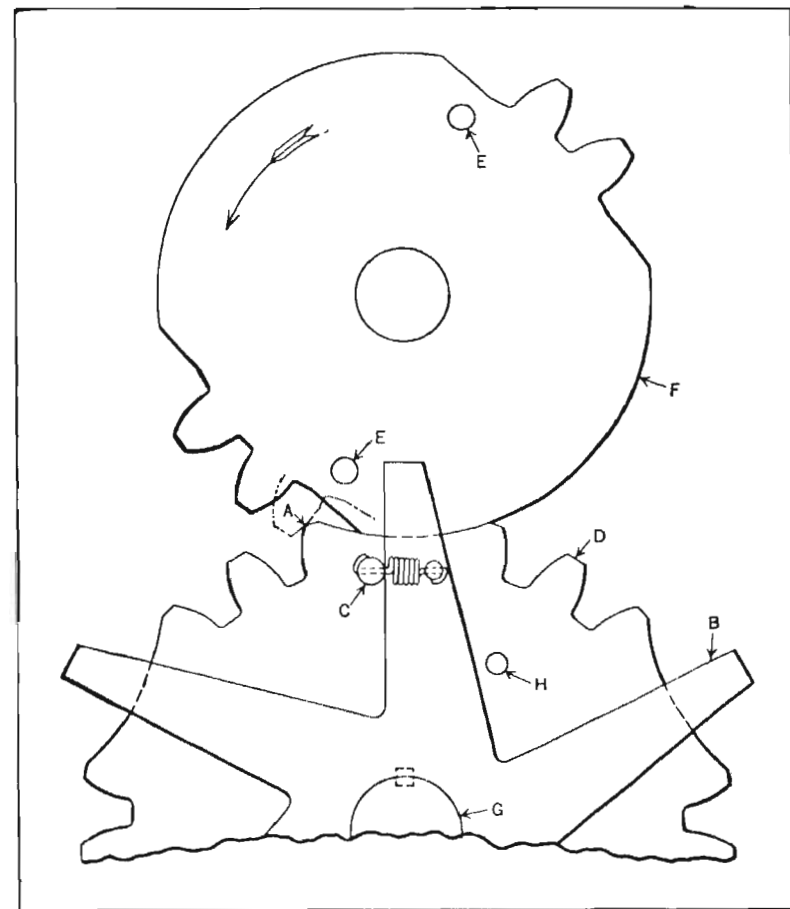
High-speed Intermittent Gearing with Arrangement for Reducing Tooth Impact
